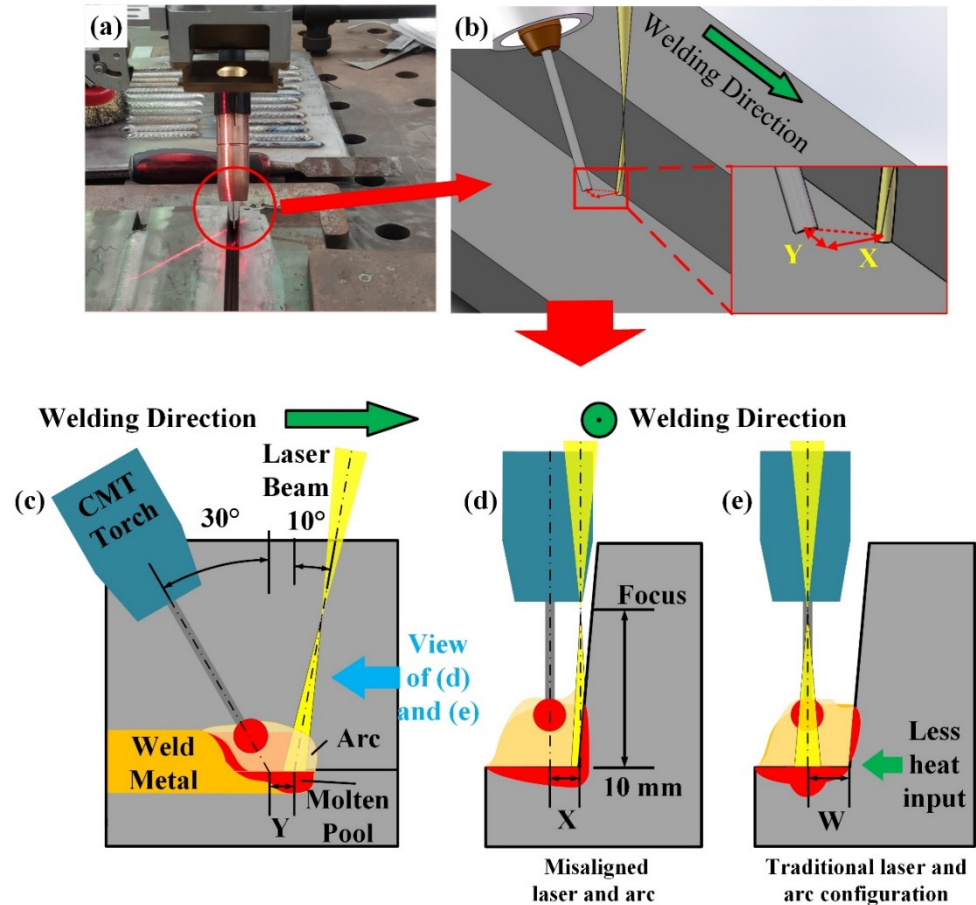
The schematic diagram of the welding process. (a) Experimental set-up. (b) The relative position of the laser and the wire (arc). (c) Side view of welding process. (d) Misaligned laser and arc in the front view of welding direction. (e) Traditional laser and arc configuration in the front view of welding direction.
